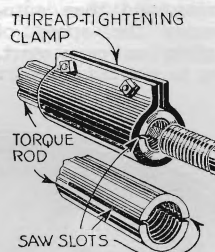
A simple clamp device that can be used to repair a stripped torque rod
